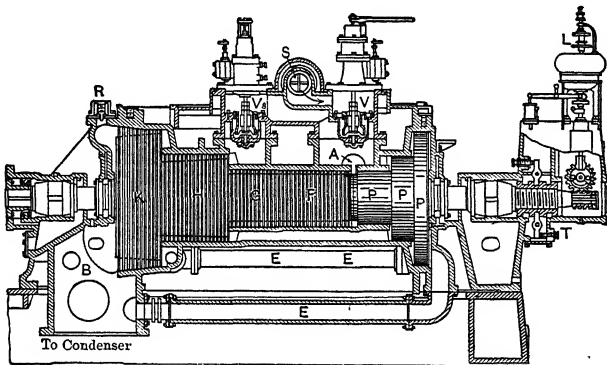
WESTINGHOUSE-PARSONS STEAM TURBINE.
